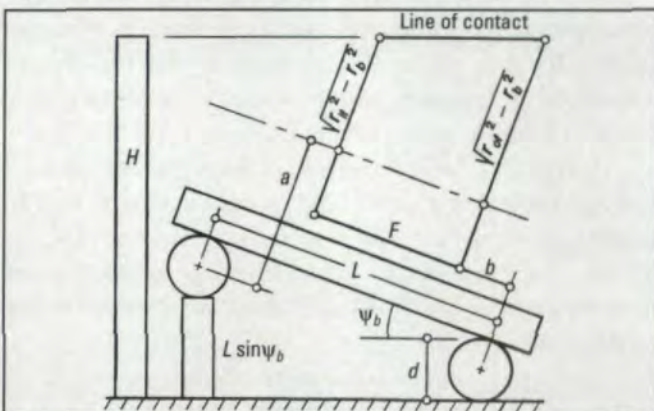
Arrangement for measuring base helix error on a helical gear.
